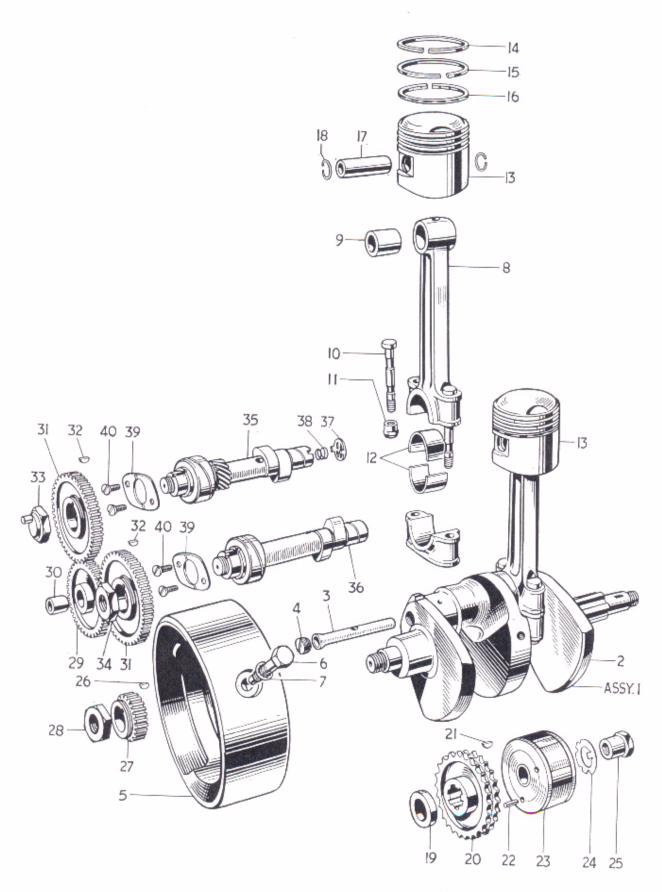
CRANKSHAFT AND CONNECTING RODS.
